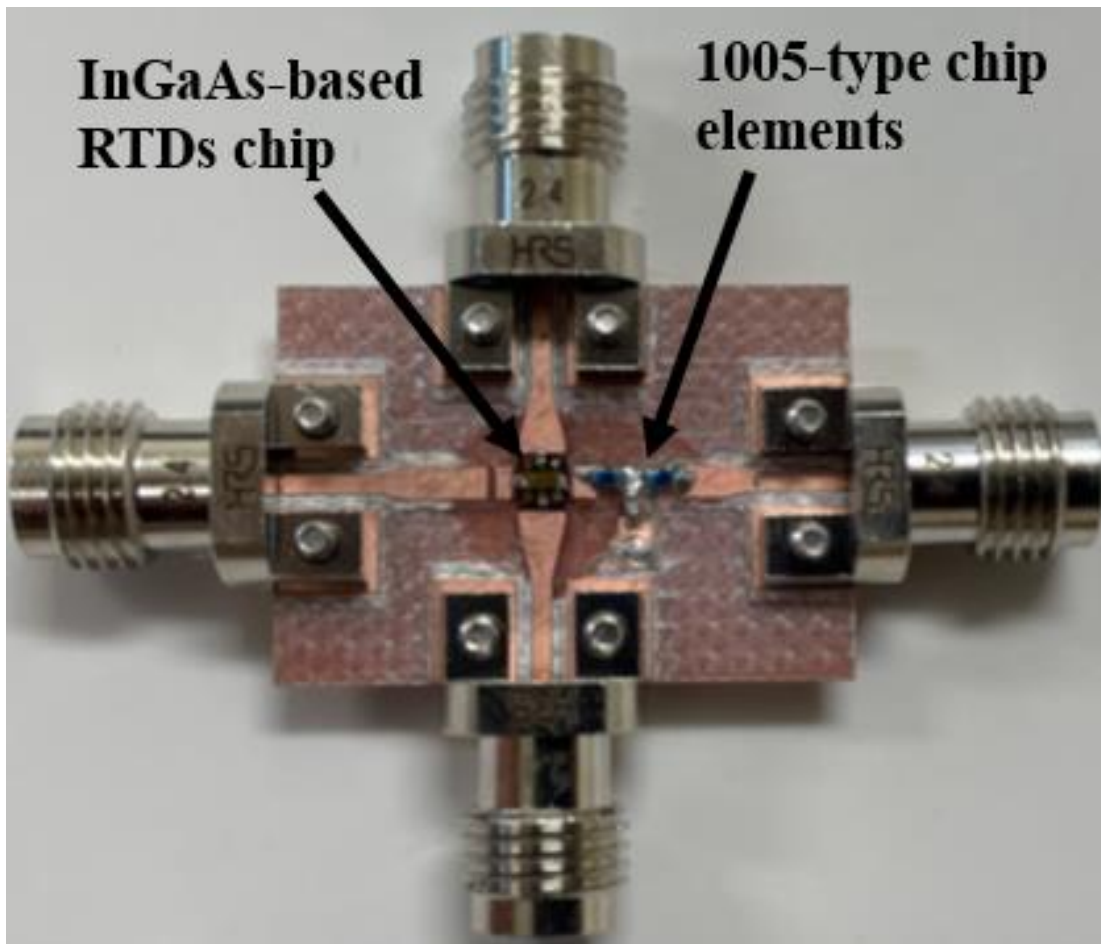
SMOBILE circuit fabricated on PCB substrate.
